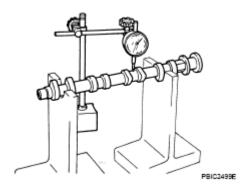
Measuring Camshaft Runout On Dial Indicator Courtesy of NISSAN MOTOR CO., U.S.A.
